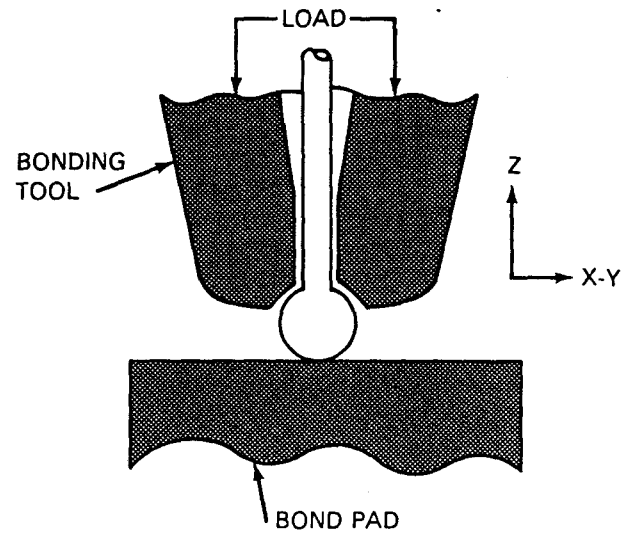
Ball Bonding Tool With Unbonded Ball
